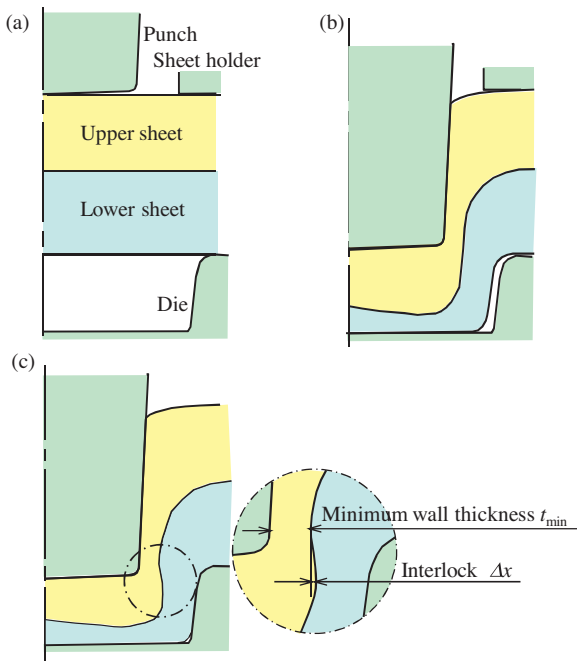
Mechanical clinching for joining of sheets. (a) Initial, (b) flaring and (c) joining.
